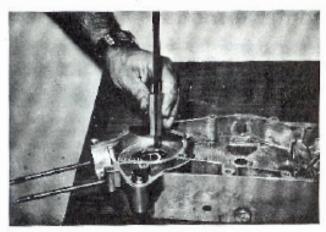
Check the height of the crankshaft chamber. Using a depth gauge check the measurement from the housing to the main bearing.
